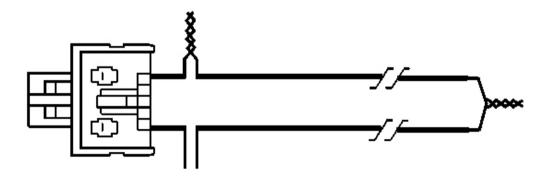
Twisting Connector Wire Lead To Deployment Wire Courtesy of GENERAL MOTORS CORP.
